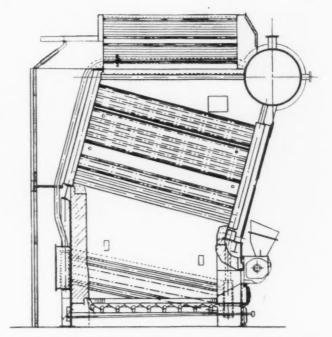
MARINE-TYPE SECTIONAL-HEADER BOILER WITH WATER-COOLED FURNACE AND SPREADER STOKER
